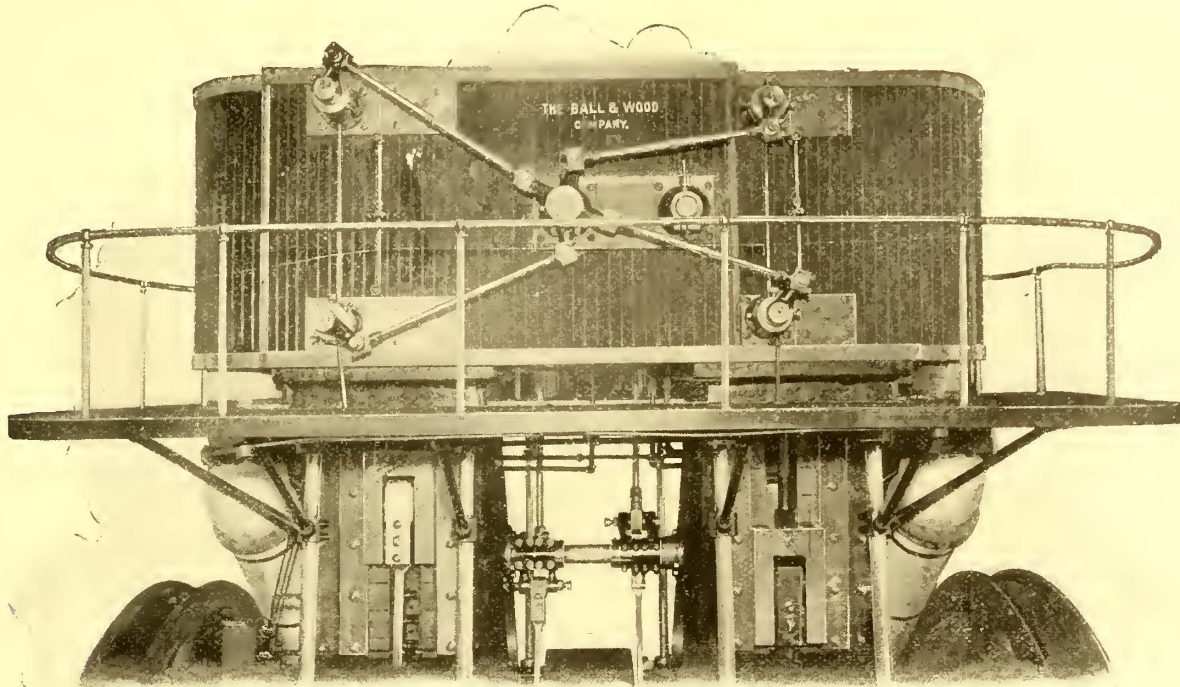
DETAIL OF VALVE GEAR, PATERSON ENGINE—BALL & WOOD CO.
